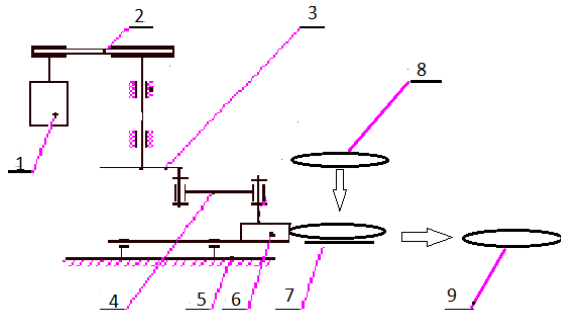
Diagram principle of crank mechanism with sausage: 1- engine; 2- transmission belt; 3- crankshaft; 4-rod; 5- slider; 6-piston of crank mechanism; 7-sausage on the top piston; 8 – sausage go to piston; 9 - sausage leave the piston.
